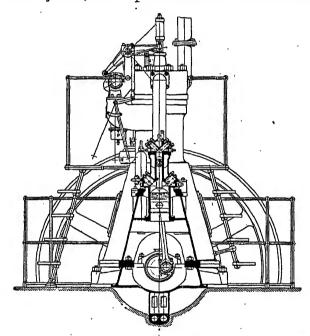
Vertical Compressor direct driven from Crank Shaft (G.M.A.).
